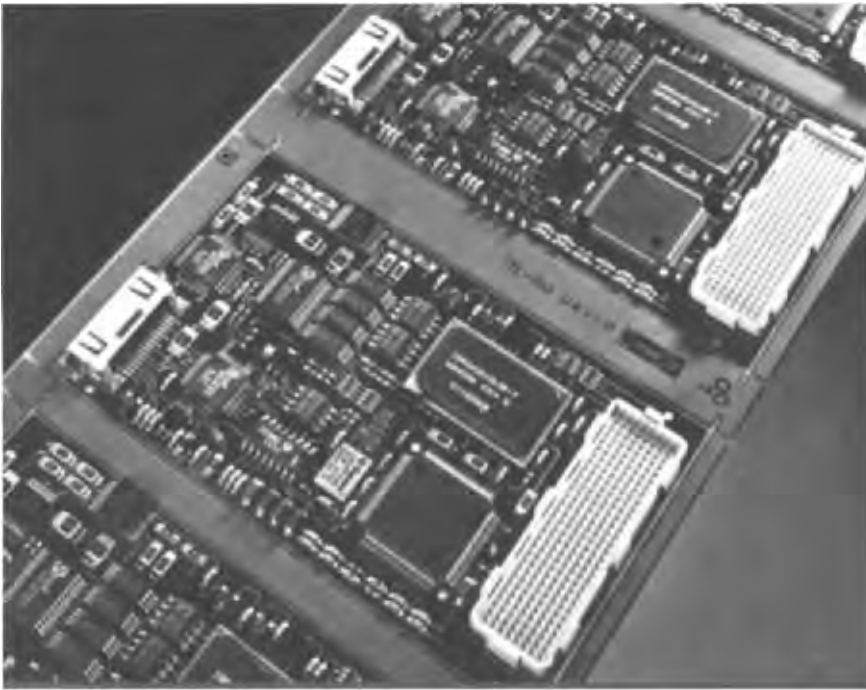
A A panel of several typical printed circuit boards with resistors, integrated circuits, capacitors, connectors and other devices soldered in position. It is often more convenient and more economical to process a panel of several boards through the assembly and soldering operations and then separate them rather than processing the boards individually. (Courtesy Universal Instruments.)
